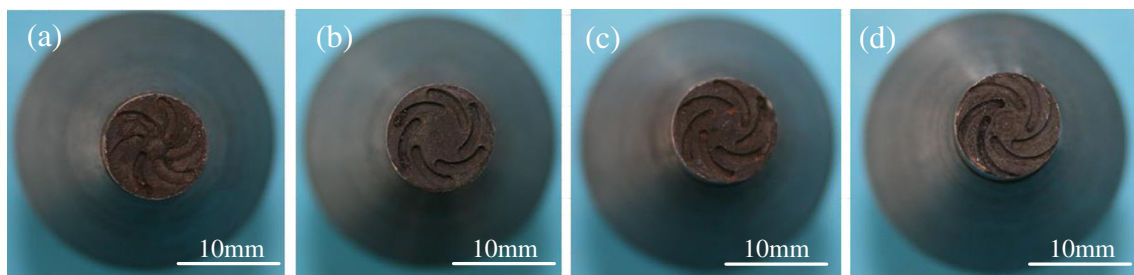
Four kinds of rotational tools used in the experiment. a The large-curvature tool. b The small-obliquity tool. c The six-groove tool. d The through-groove tool
